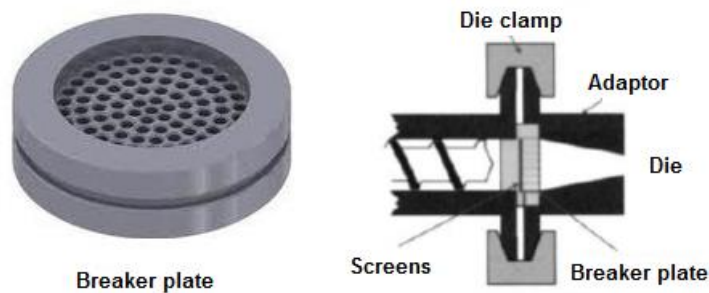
Extruder head assembly (Giles et al., 2005)
